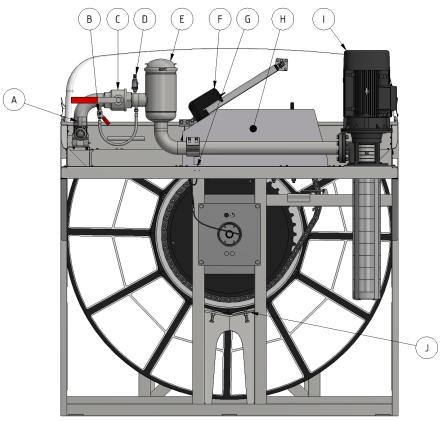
Hydrotech Discfilter in HPF2200 series type 2 (outlet side).
